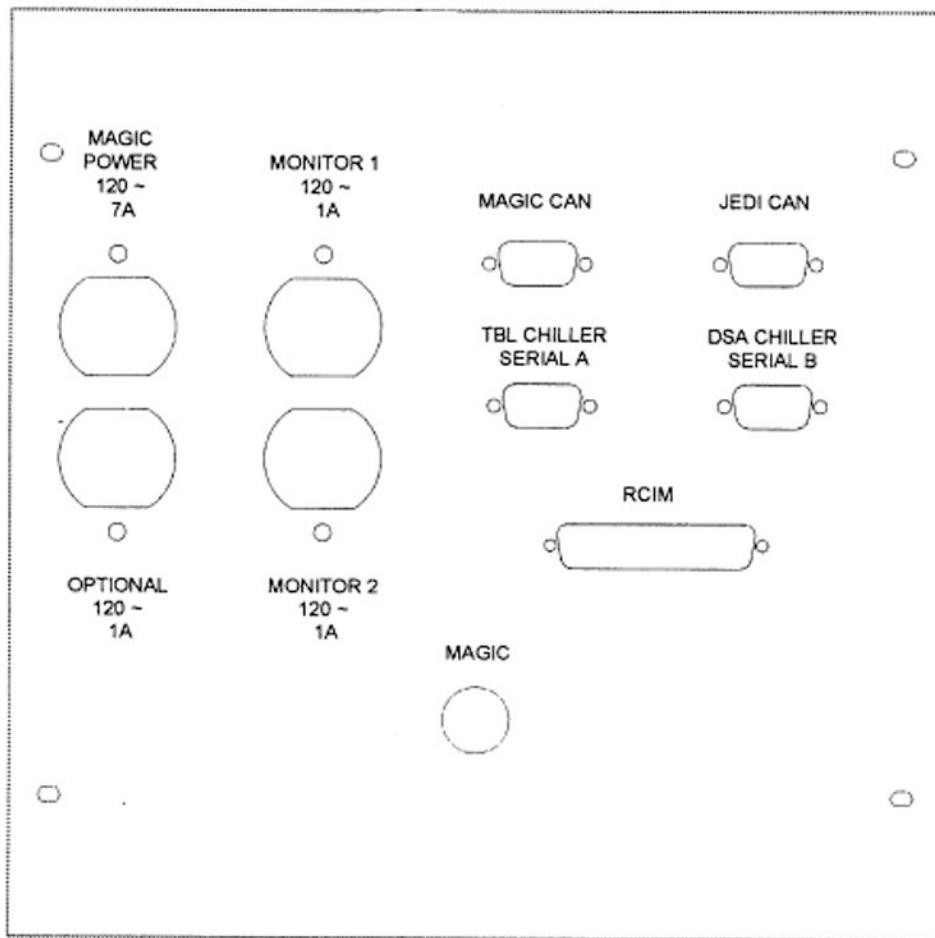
Wall Plate Dimensions 266.7 x 266.7 mm (10.5 x 10.5 in)
